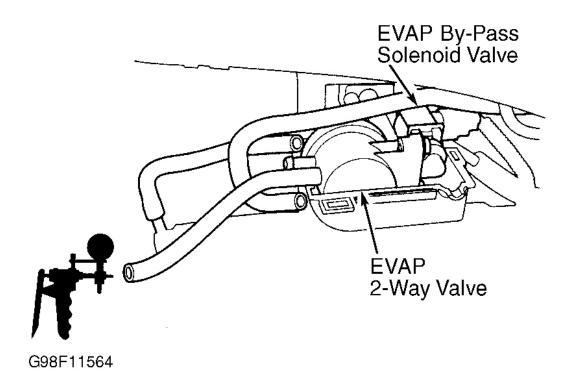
Locating EVAP 2-Way Valve Vacuum Hoses Courtesy of AMERICAN HONDA MOTOR CO., INC.
